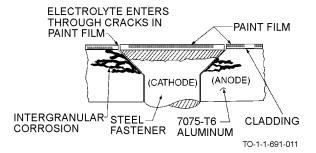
Intergranular Corrosion of 7075-T6 Aluminum Adjacent to Steel Fastener
